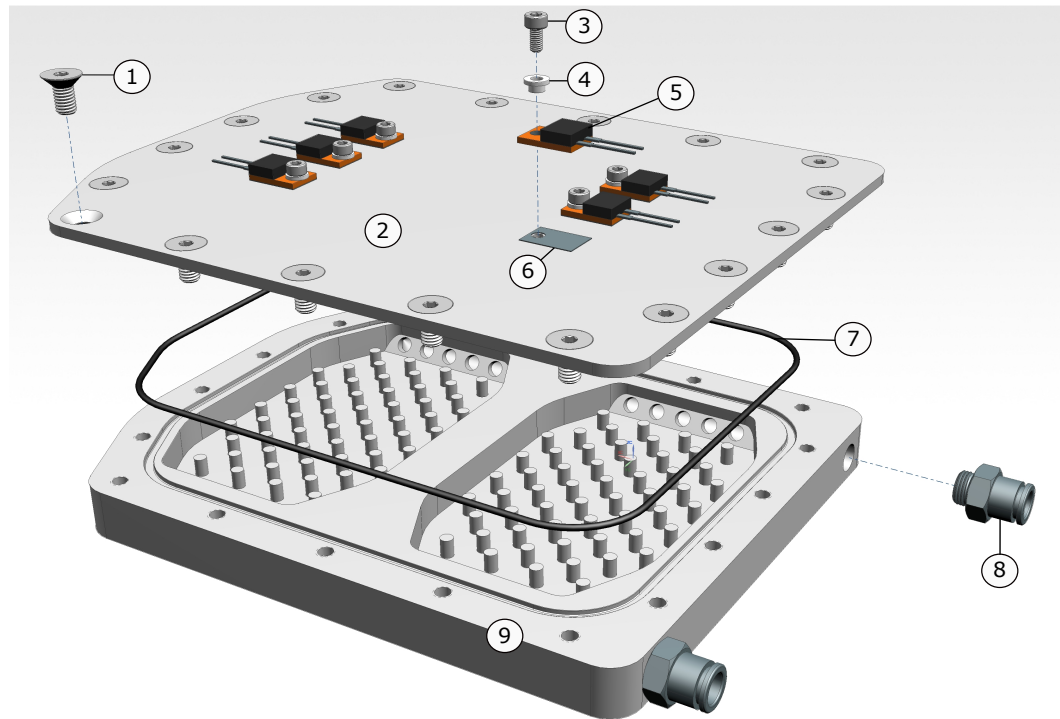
Proposed Full-Sized Prototype Cold Plate Assembly
